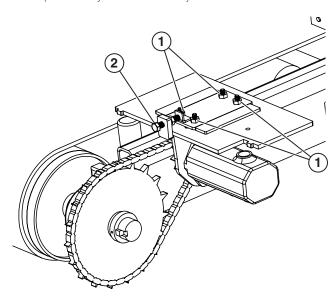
Adjust Conveyor Belt Drive Chain after First 10 Hours of Use
